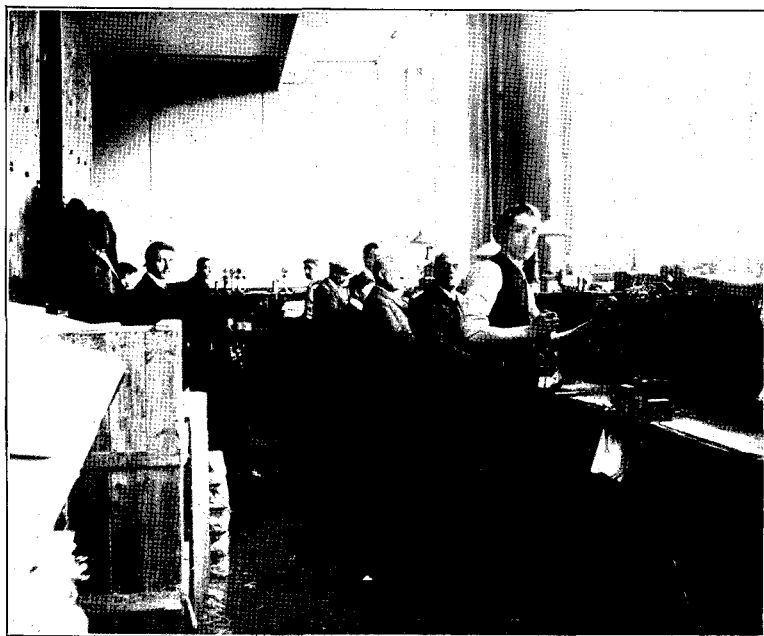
INSTRUMENT FITTING BENCHES (FIRST FLOOR).
